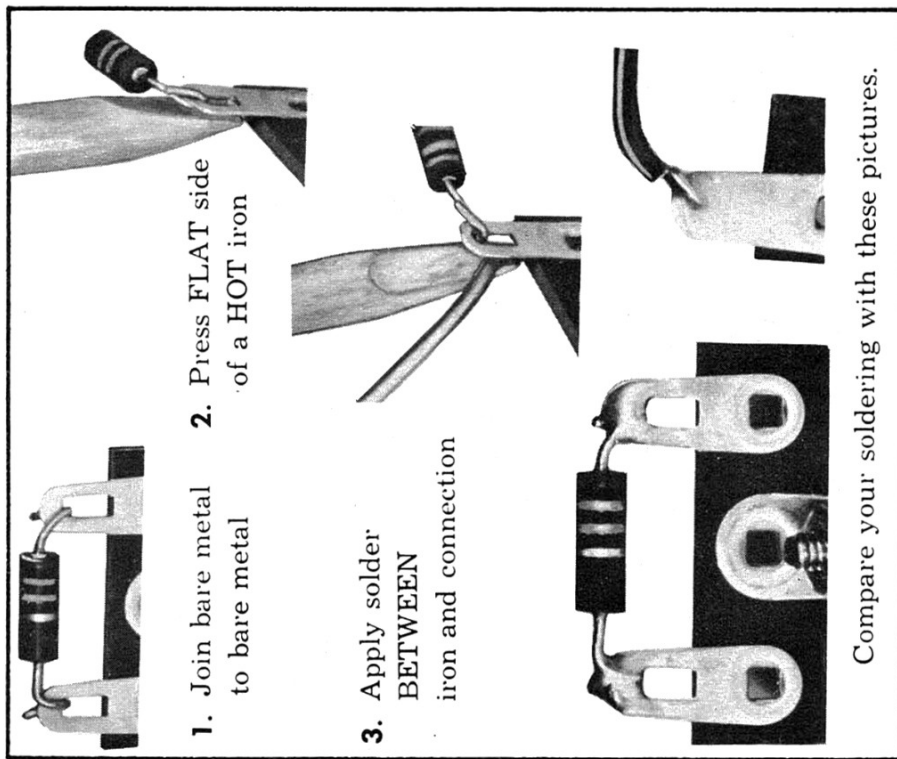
THE ONE-TWO-THREE OF GOOD SOLDERING
